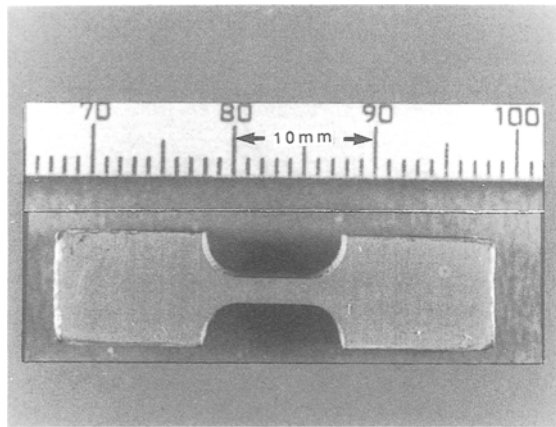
A tensile test sample with the single-stepped geometry separated by ultrasonic machining of the composite
